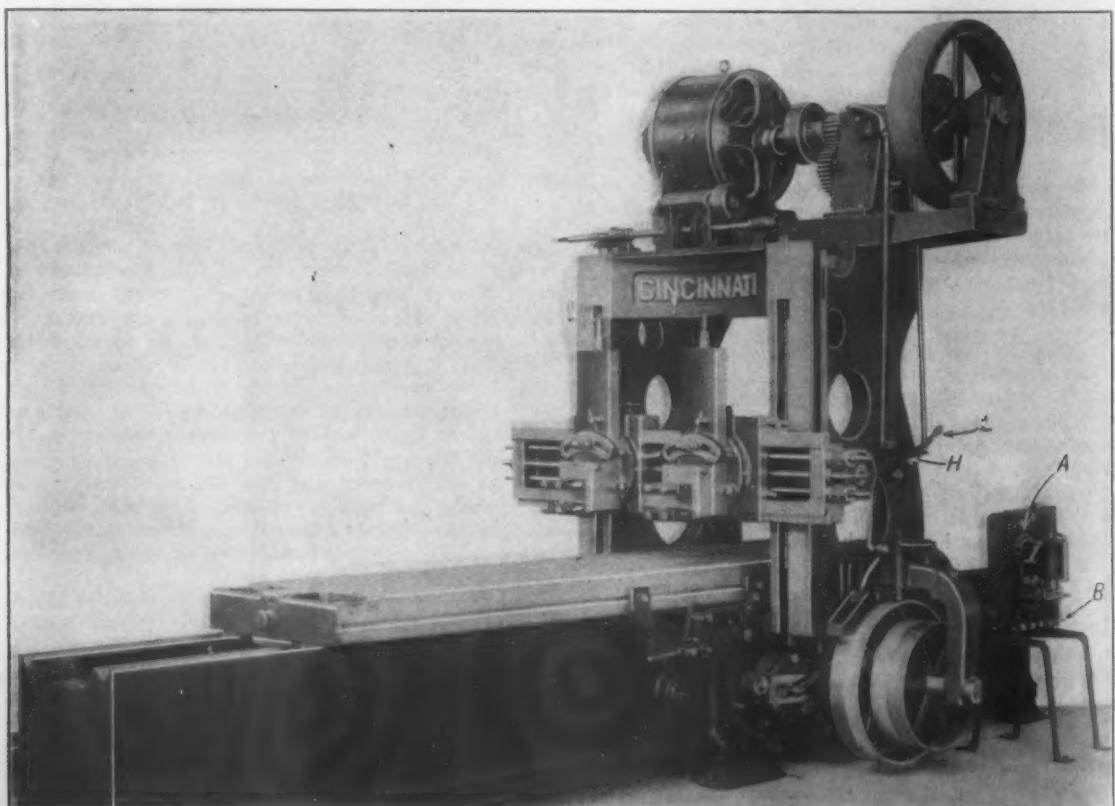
A 36-In. Planer Equipped with a Special Slow Speed Drive Designed by the Cincinnati Planer Company, Cincinnati, Ohio.
